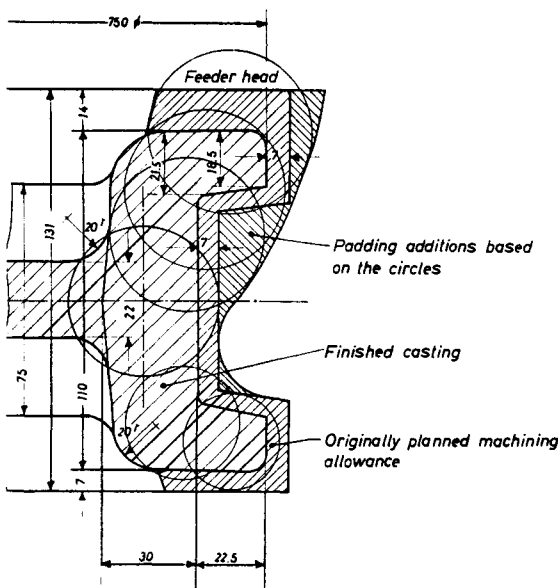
Marking out a turbine wheel rim in Heuvers circles.
